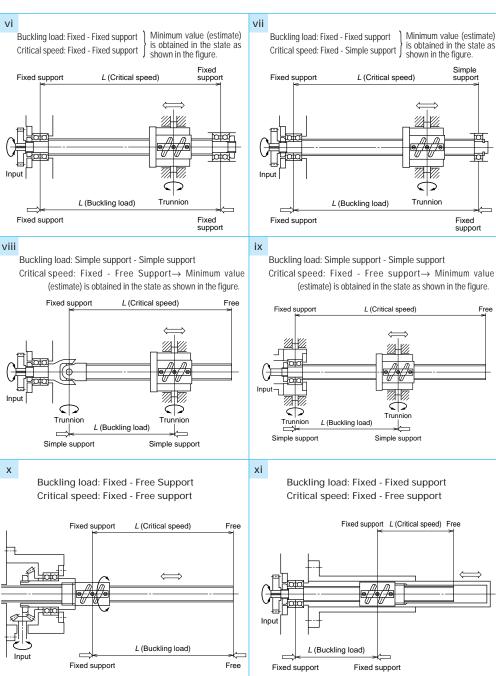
Supporting conditions of screw shaft and ball nut w
